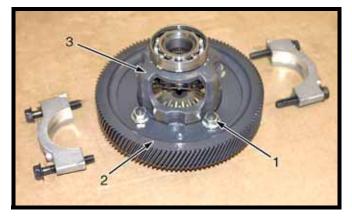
Saddle Bolts, Saddles, and Differential-Carrier Assembly Removed
